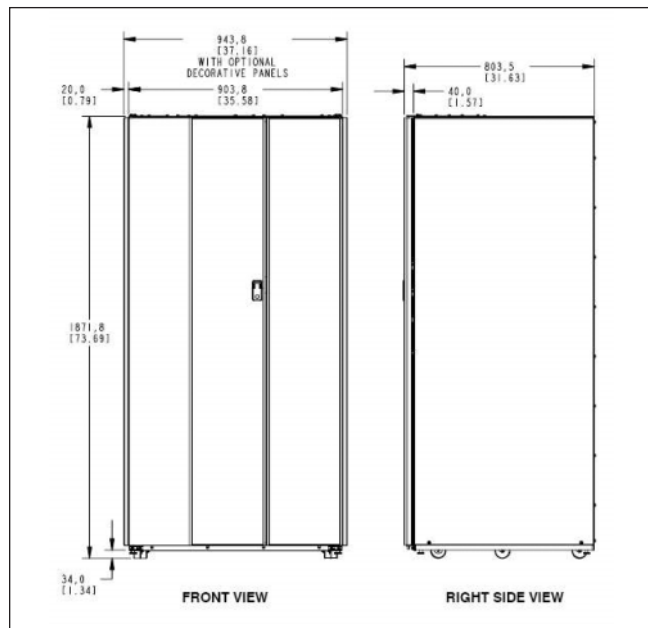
9390 (40-80 kVA) IDC Front and Side View
